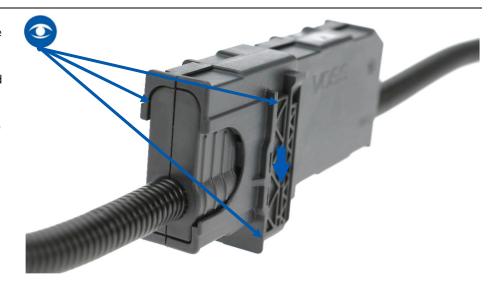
Engaged QC system 301 EFSP2 – sdie view
